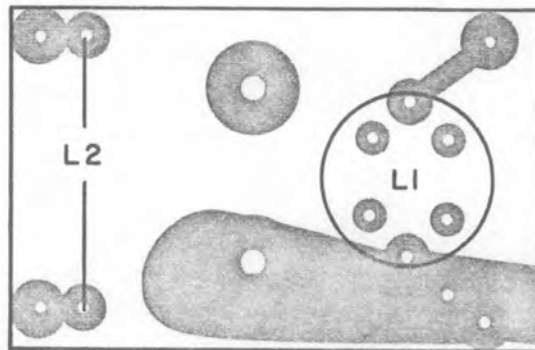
Part 16071 Inductor Board (A7A1A2), Component Locations
